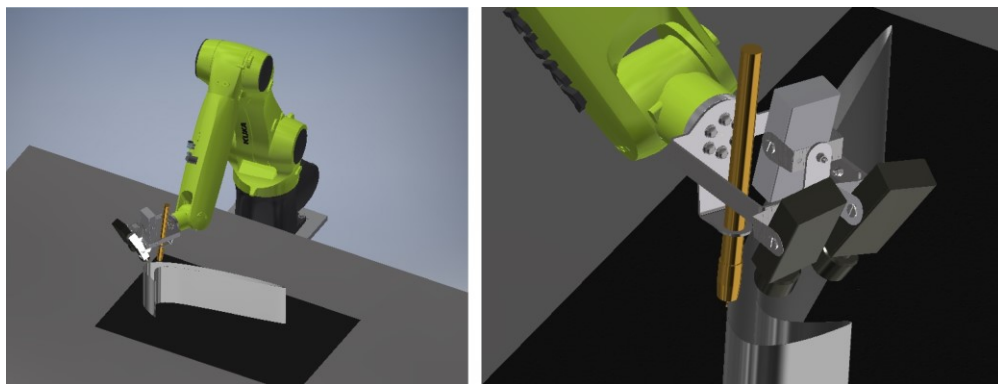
A possible configuration in which the monitoring system is mounted on a welding robot
